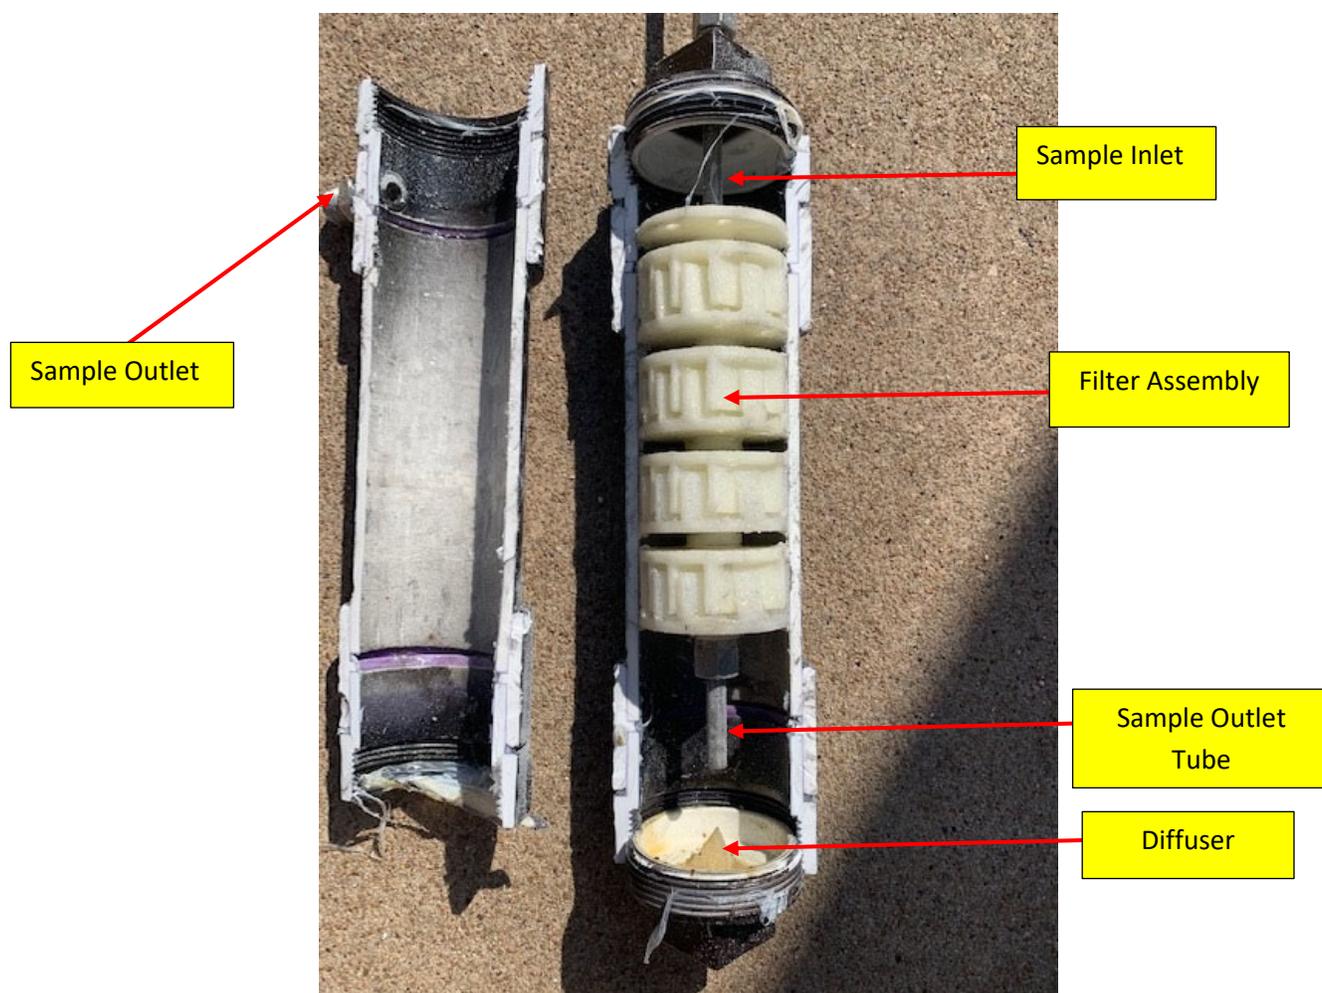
MODEL 7 FILTER ASSEMBLY
